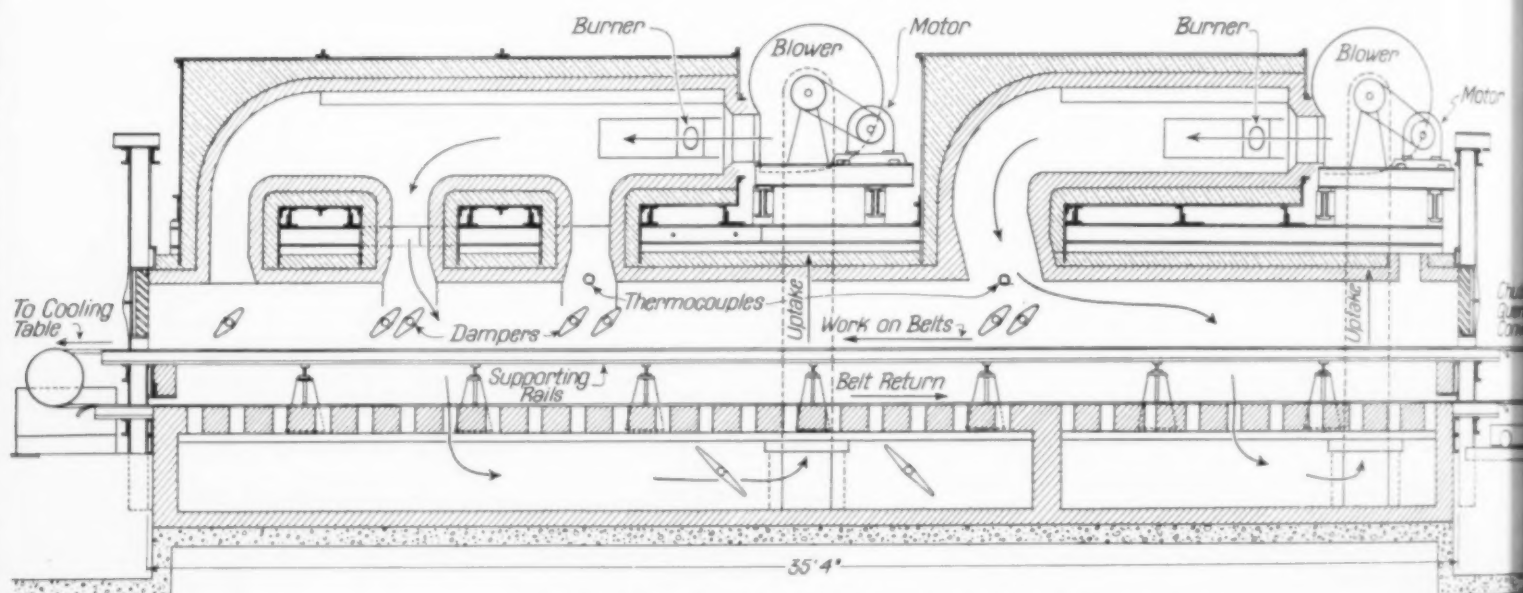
Cross Section Along Centerline of Air Draw Furnace
